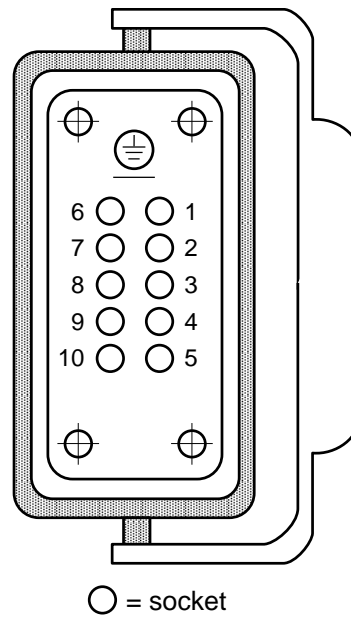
Plug on the injection moulding machine and on the peripheral equipment
